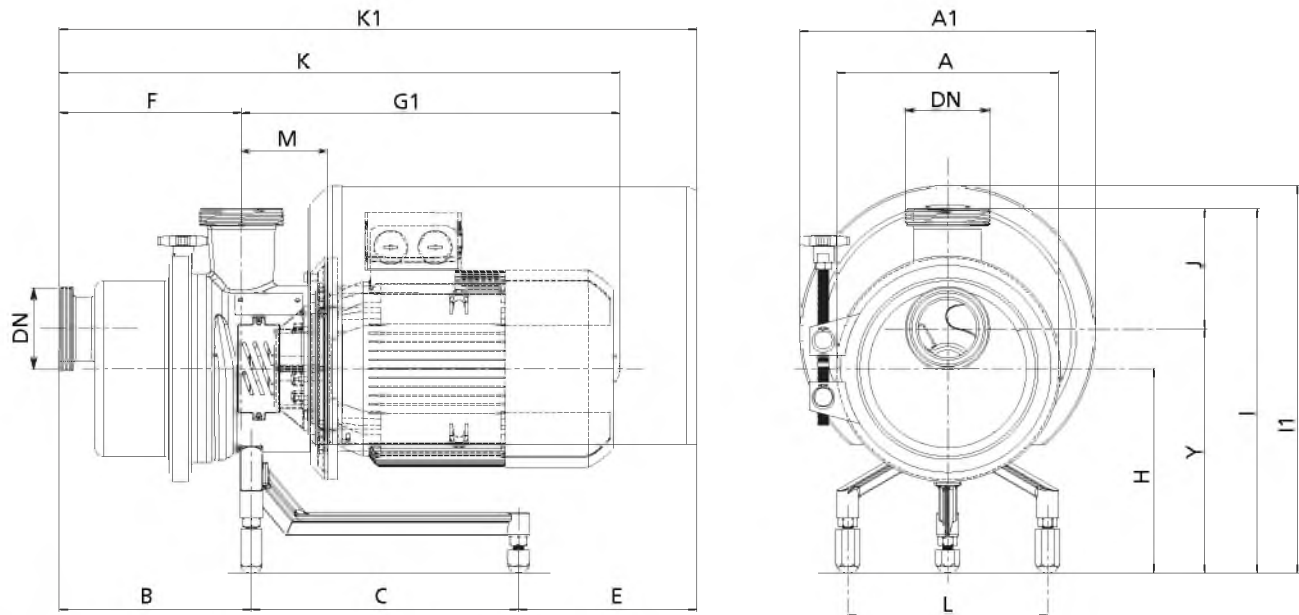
Pump set with motor shroud, with 3-point ball feet
